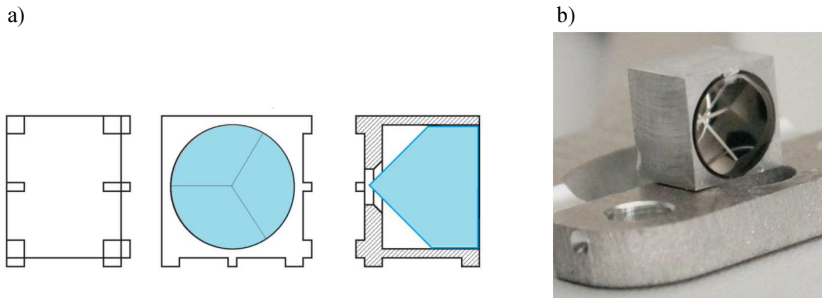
A simplified design drawing of the assembly of a measuring cube corner reflector (a); a view of mounting of the measuring reflector to a tested part (b).
